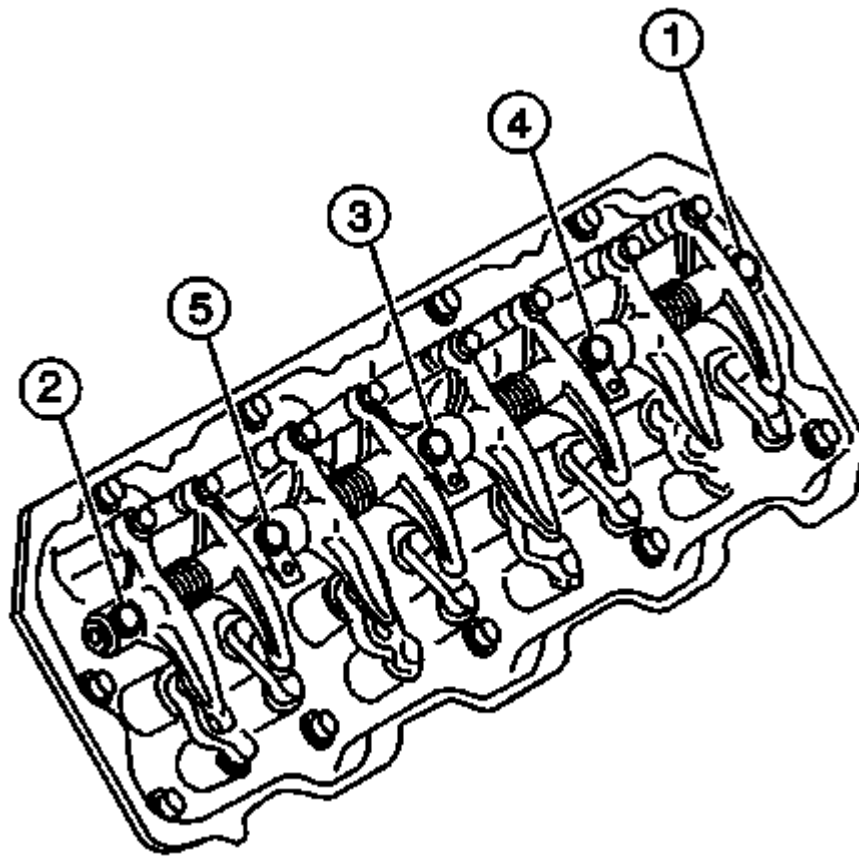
Rocker Arm Shaft Bolts Loosening Sequence
